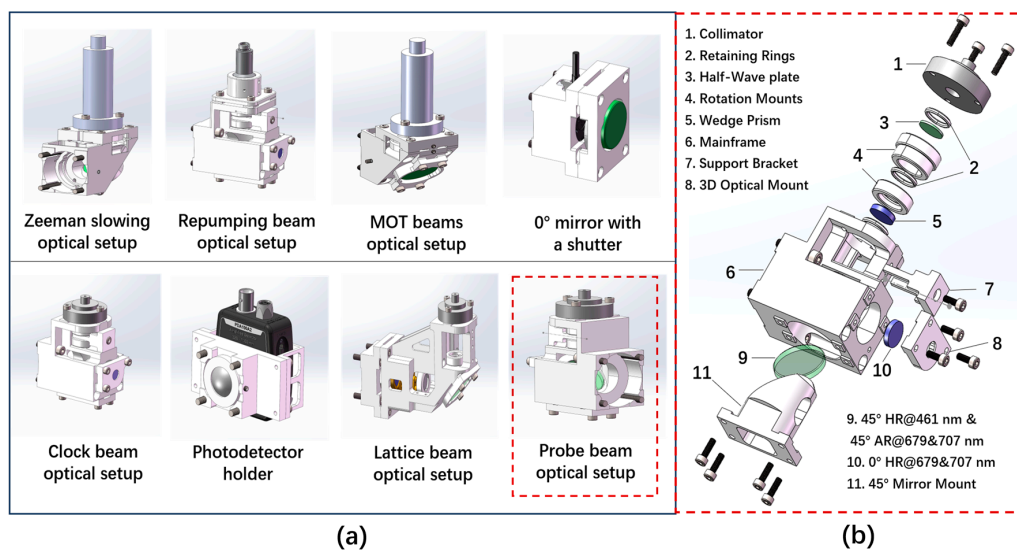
(a) Schematic of the customized integrated optical setups. (b) Exploded view of the probe beam optical setup.
